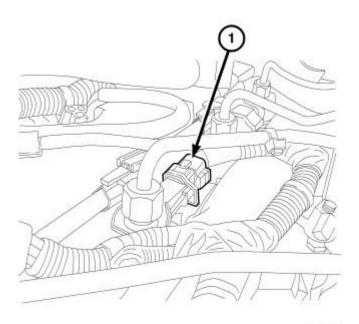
CAMSHAFT POSITION SENSOR HARNESS CONNECTOR Courtesy of CHRYSLER LLC
